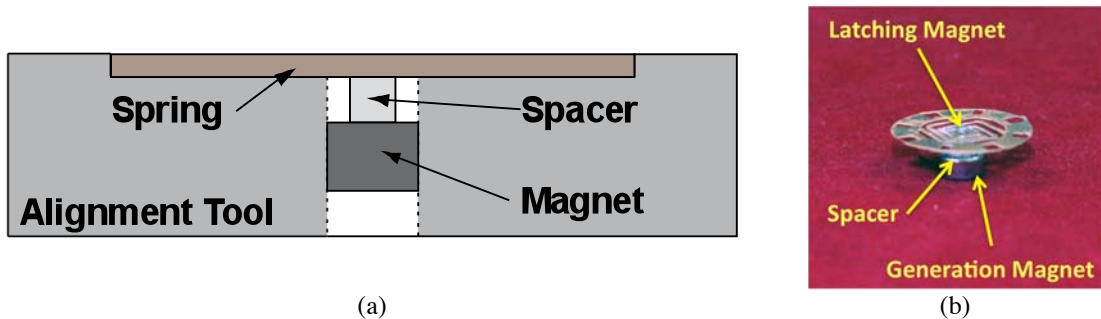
a) Spring assembly alignment jig cross-section. b) Assembled FIG spring.
